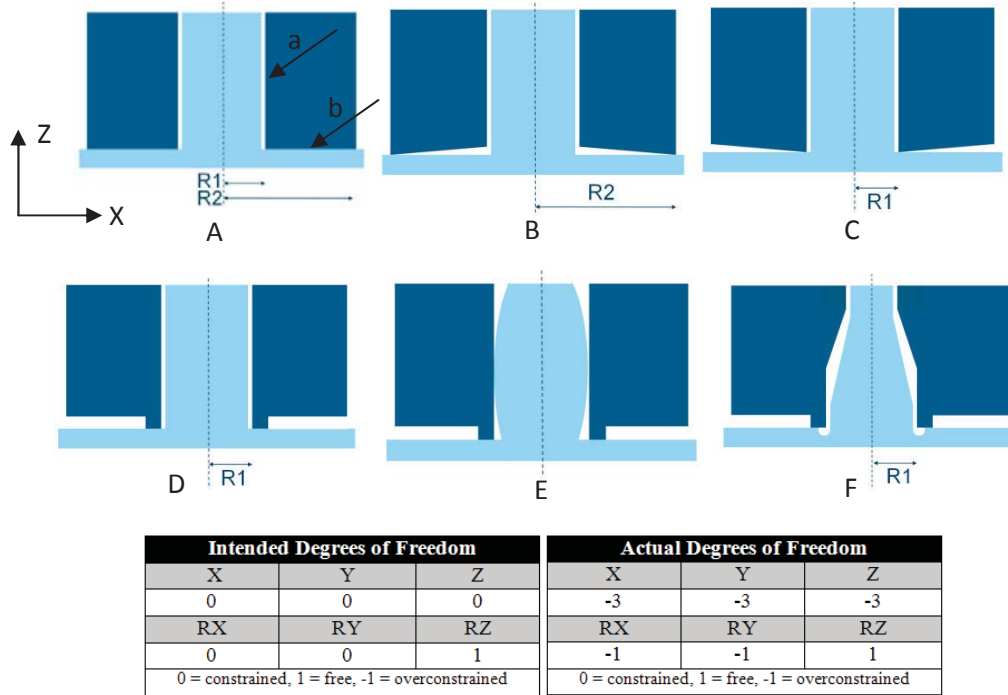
A gearwheel (dark part) runs on a center pin. The objective is to have low friction and a minimum of wobbling.
